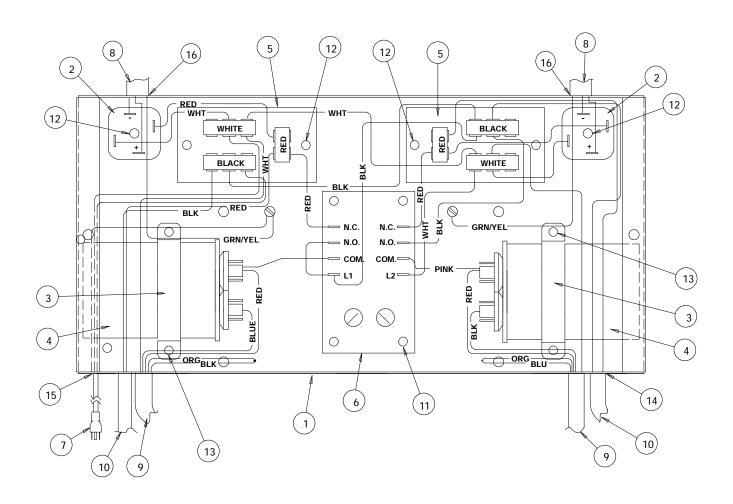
ELECTRICAL BOX ASSEMBLY
